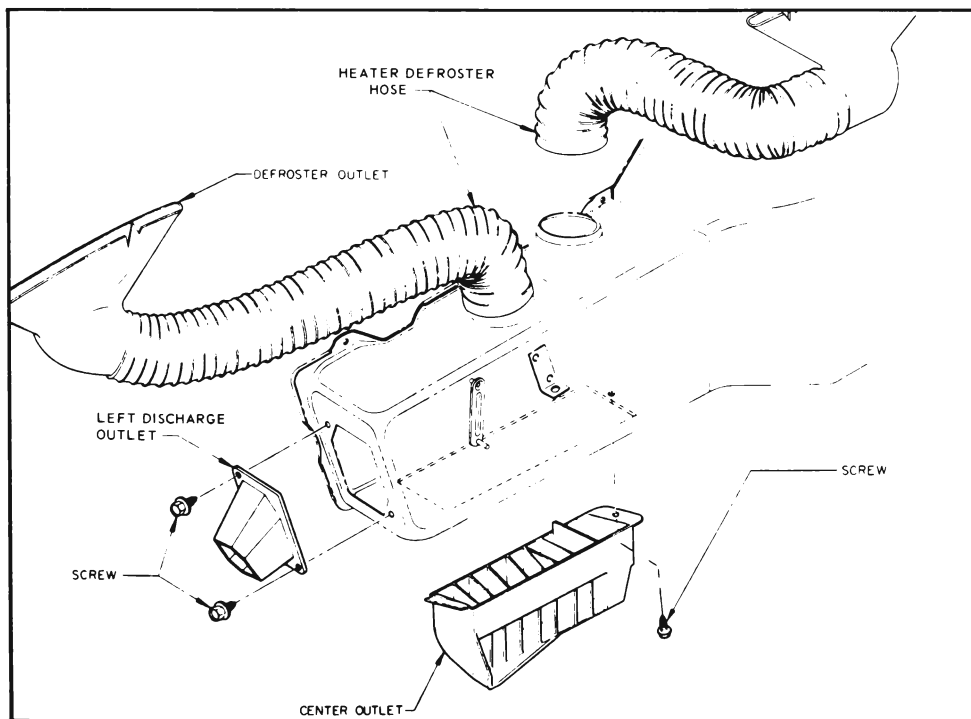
Heater Assembly Outlets - 45000, 46000 and 48000
